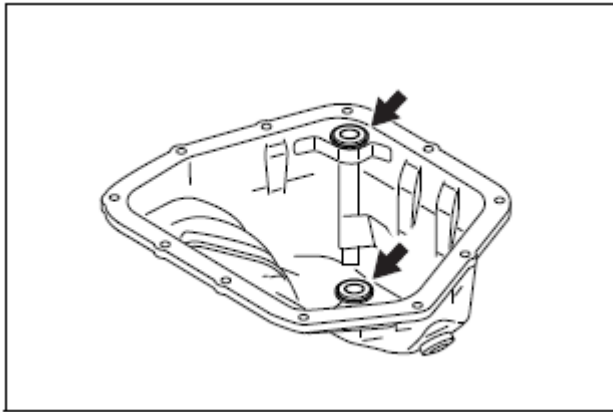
Identifying Oil Pan Sub-Assembly No. 2 Seal Rings
